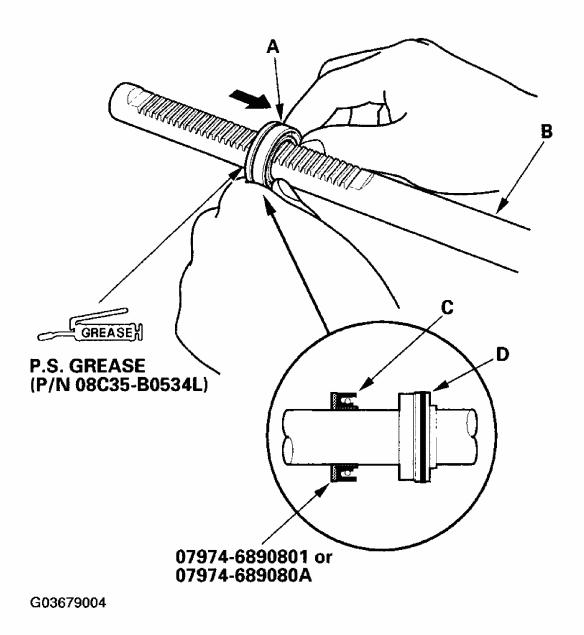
Installing Cylinder End Seal Onto Steering Rack With Its Grooved Side Courtesy of AMERICAN HONDA MOTOR CO., INC.
